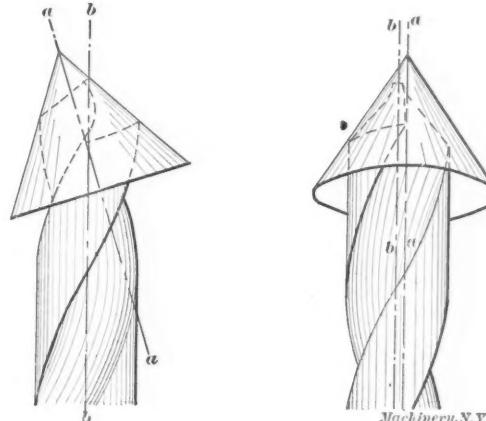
Form given to the Lip of a Drill by the Sellers Drill-grinding Machine
